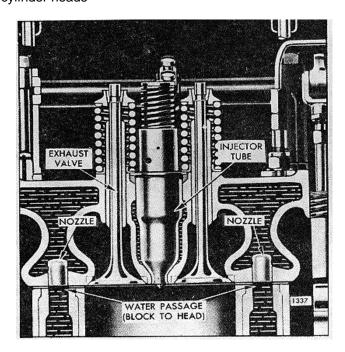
Coolant Passages Around Exhaust Valves and Fuel Injectors (C 1980 General Motors Corp.
